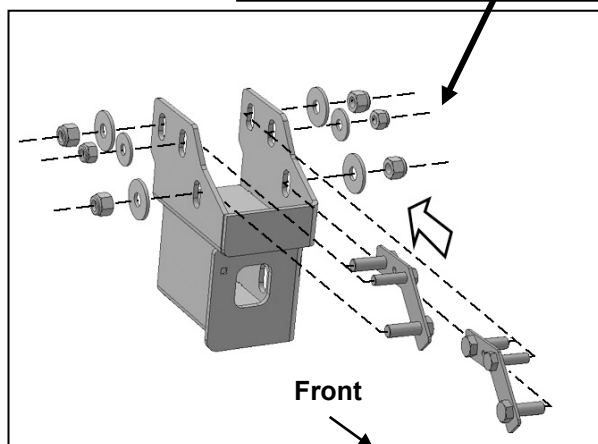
Attach driver/left Bracket to (4) 12mm outer bolts in 12mm/10mm Bolt Plates
